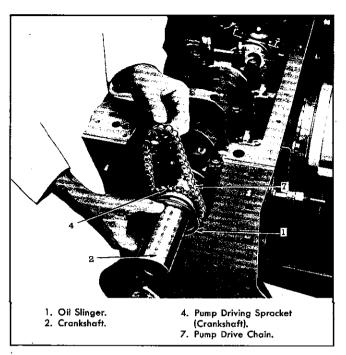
Replacing Lubricating Oil Pump Driving Sprocket on Crankshaft.
